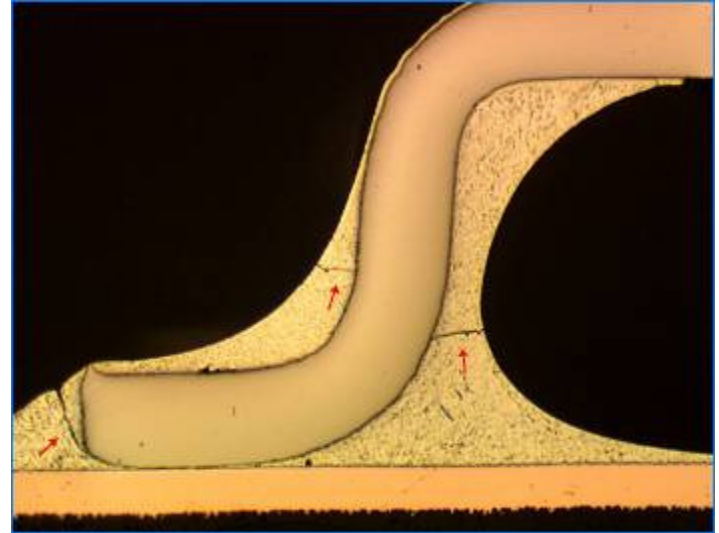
cross section, SN68, U16, left lead solder partial crack, 100x
